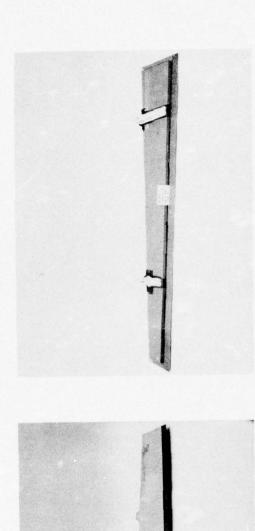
UPPER SURFACE, STATIC ARTICLE NO. 2, SPOILER ASSEMBLY
